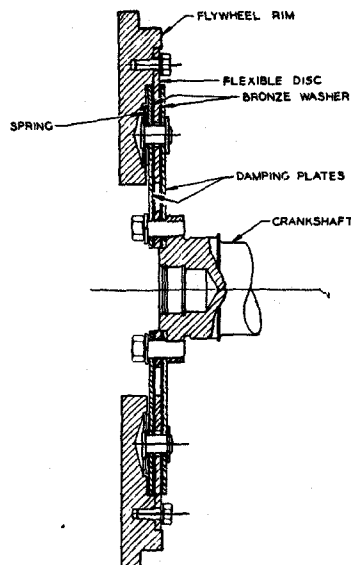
"Damped bending" flywheel used on 38-60, 65 and 75 V-8 engines
